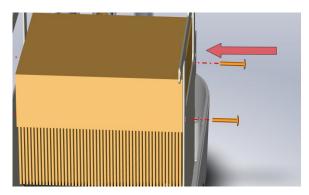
Step 2 Install 2 screws attaching TE module to the front bracket
